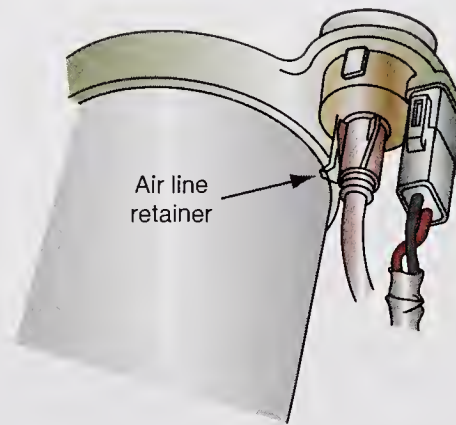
Air line removal from the air spring solenoid valve.
